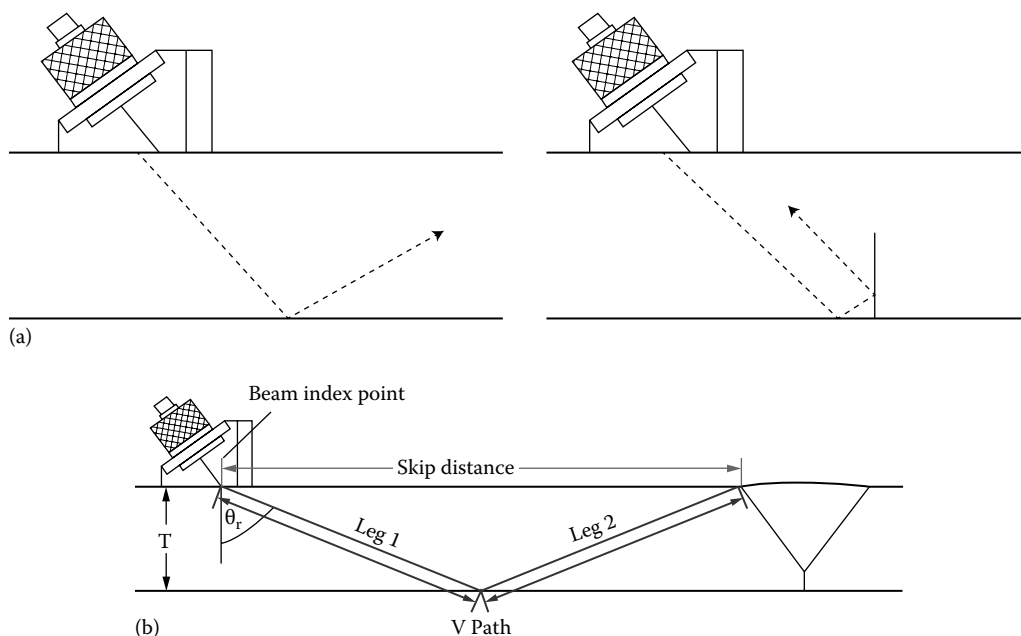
Angle beam technique. (a) First leg test shows a perpendicular crack reflecting sound wave and (b) second leg test—the angled sound beam after bouncing off the far side, to cracks perpendicular to the coupling surface (second leg test). (Courtesy of Olympus NDT Inc., Waltham, MA.)
